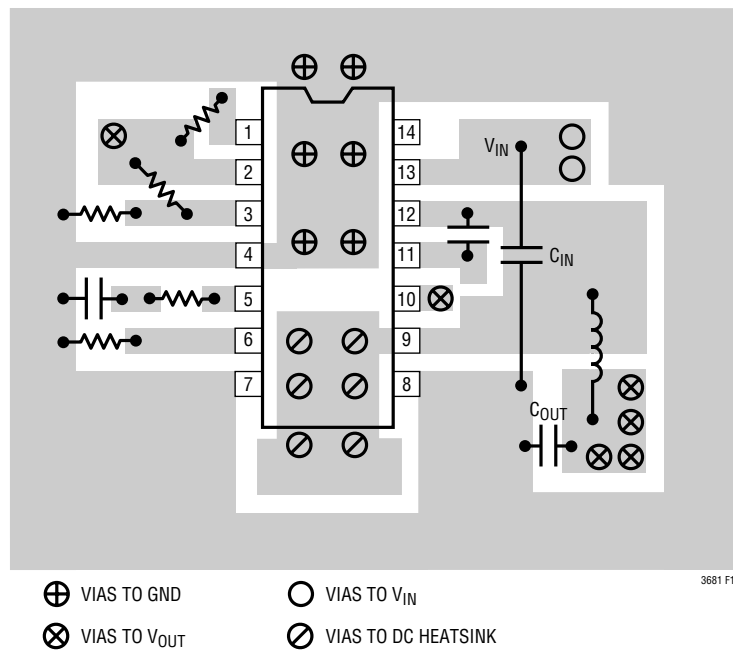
A Good PCB Layout Ensures Proper, Low EMI Operation
